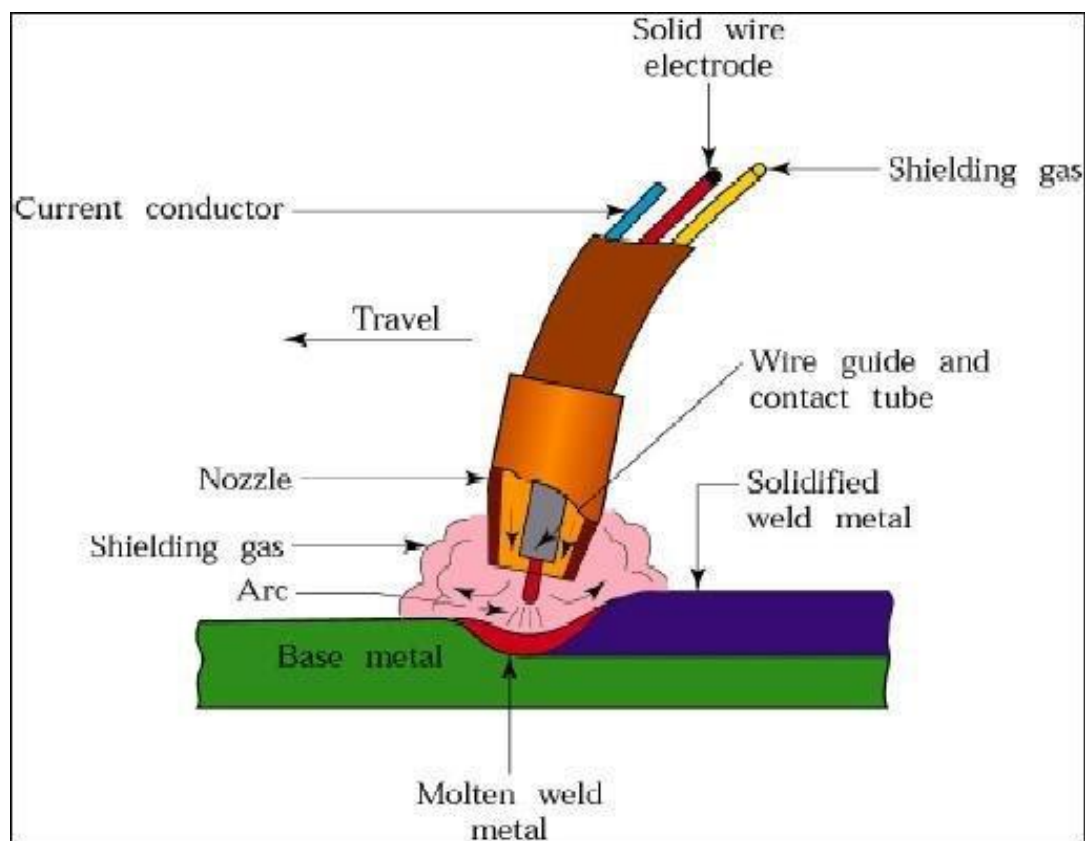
Metal Inert Gas Welding [18]
